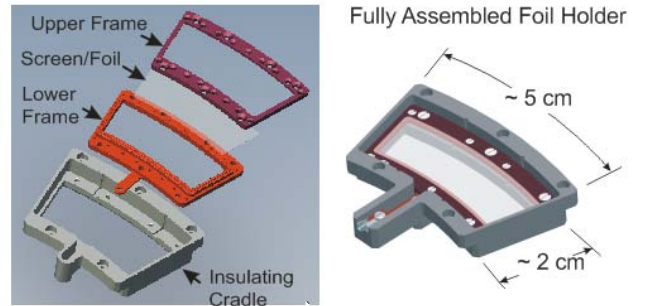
EXPLODED AND ASSEMBLED CAD MODEL VIEW.
